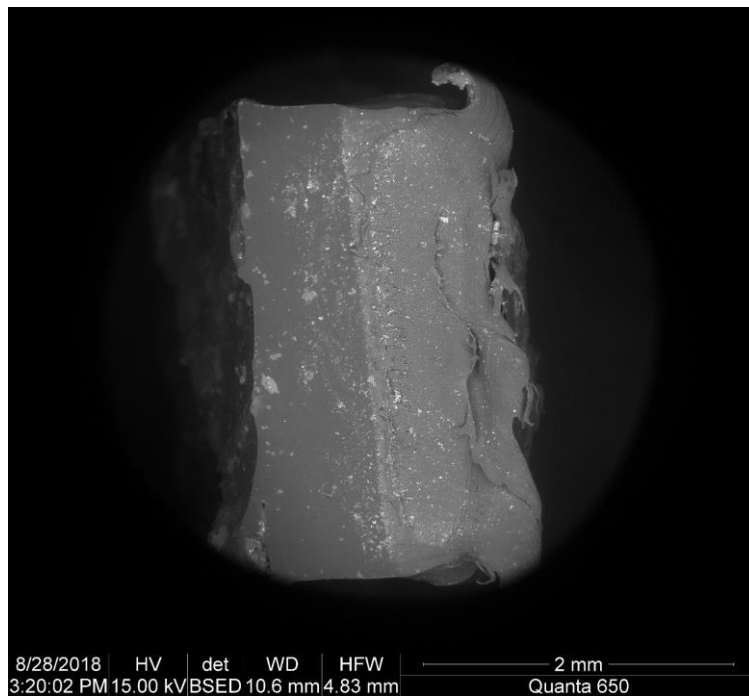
Fracture surface of a NCTL specimen of unaged textured specimen; SCR = 2700 hours.
